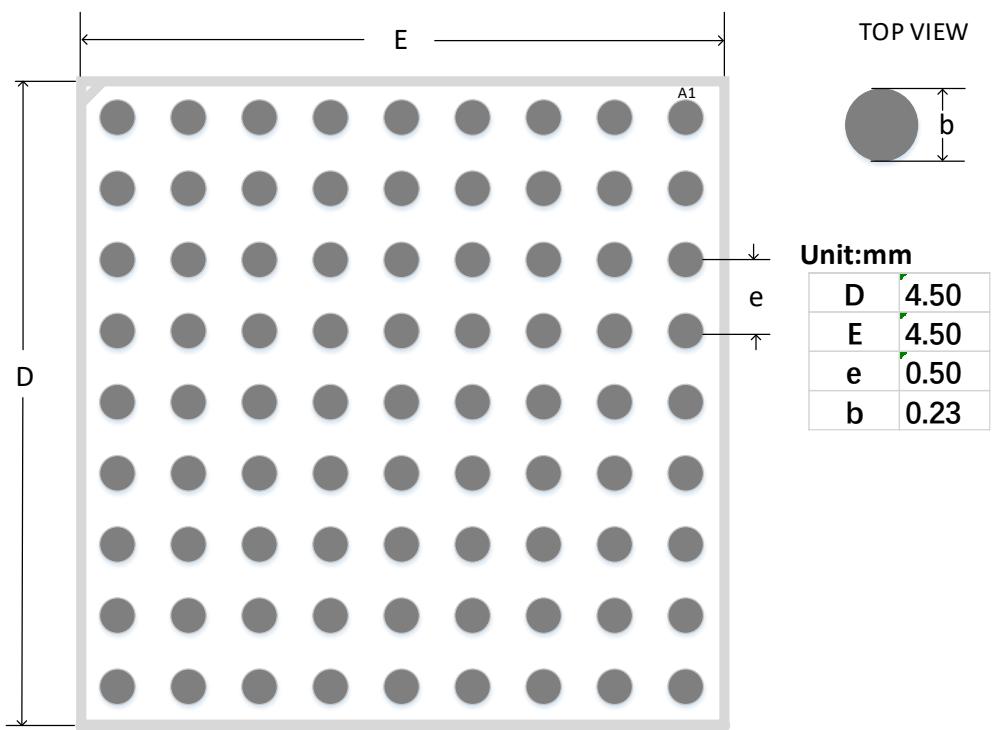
Recommended PCB Layout MG49P/MG49PG/MG49G
